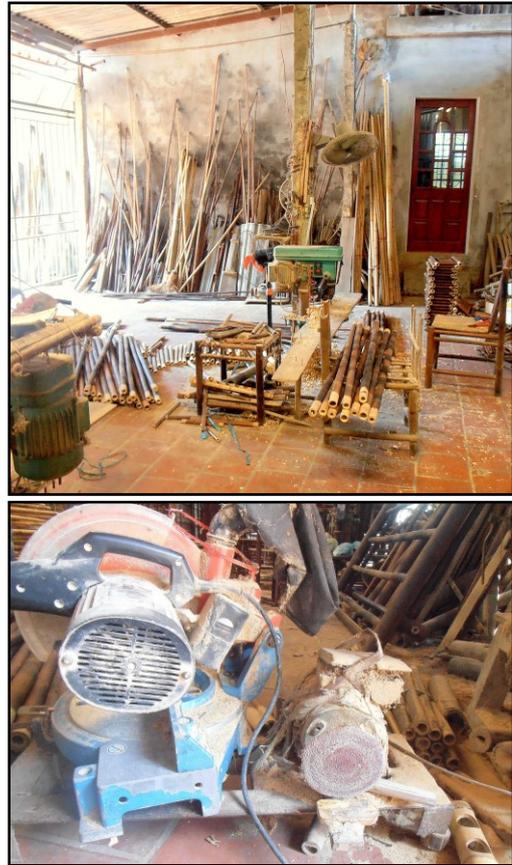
Electric power tools as part of the tool kit in the bamboo craft village in Xuân Lai village. (above) A drill press needed to drill holes for the joints. (below) A circular saw and sanding machine.
